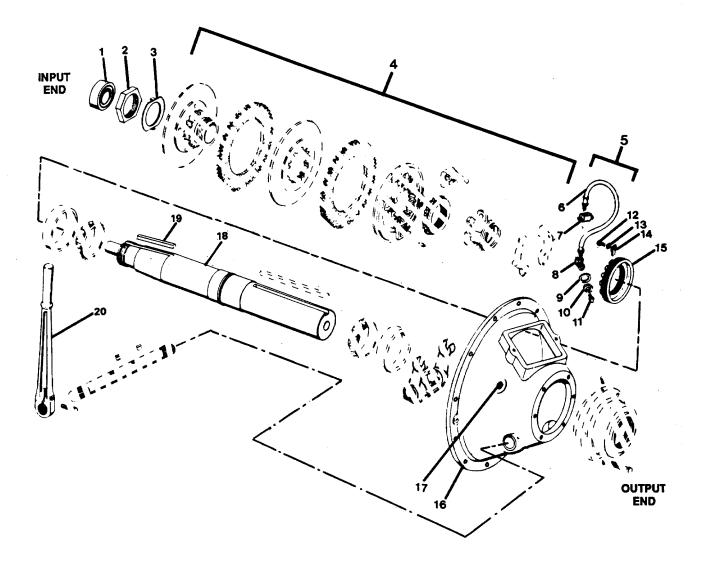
Friction Clutch Assembly Repair (Sheet 1 of 2).
